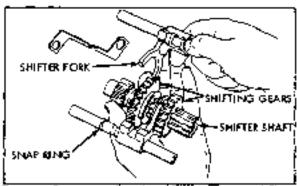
Assembling Shift Fork, Gears and Shart Assemblies
